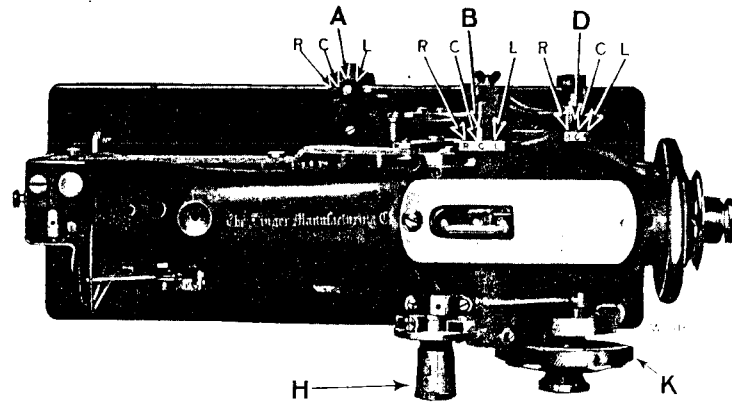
TOP VIEW OF MACHINE SHOWING ADJUSTMENTS
